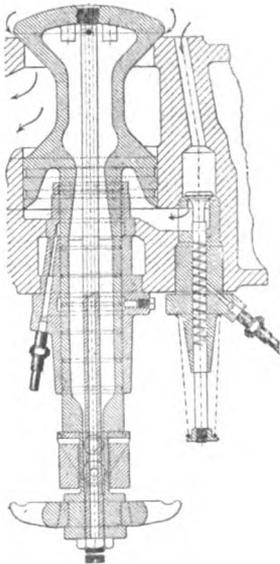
Crossley double-seated Exhaust Valve.
